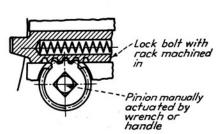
A rack is machined in the lock bolt. Pinion meshing with rack is manually actuated with wrench or handle.
